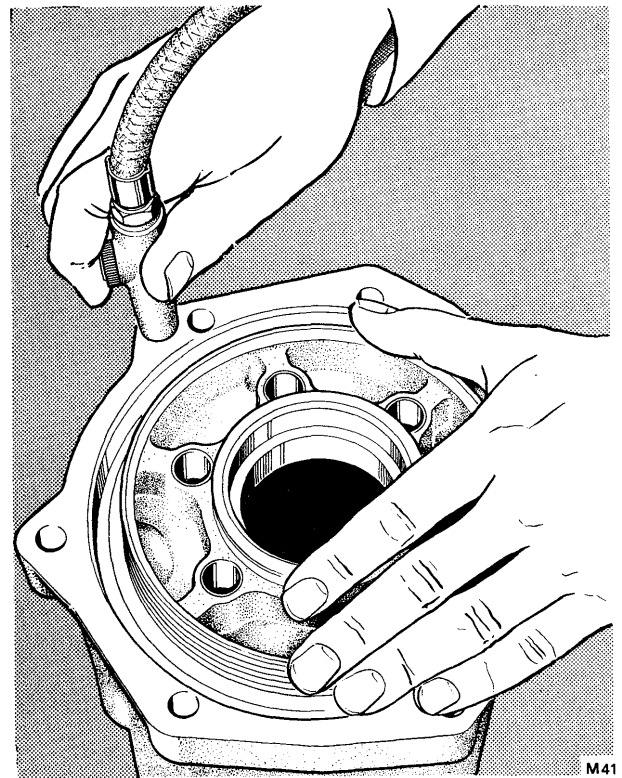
REMOVING THE REVERSE CLUTCH PISTON
